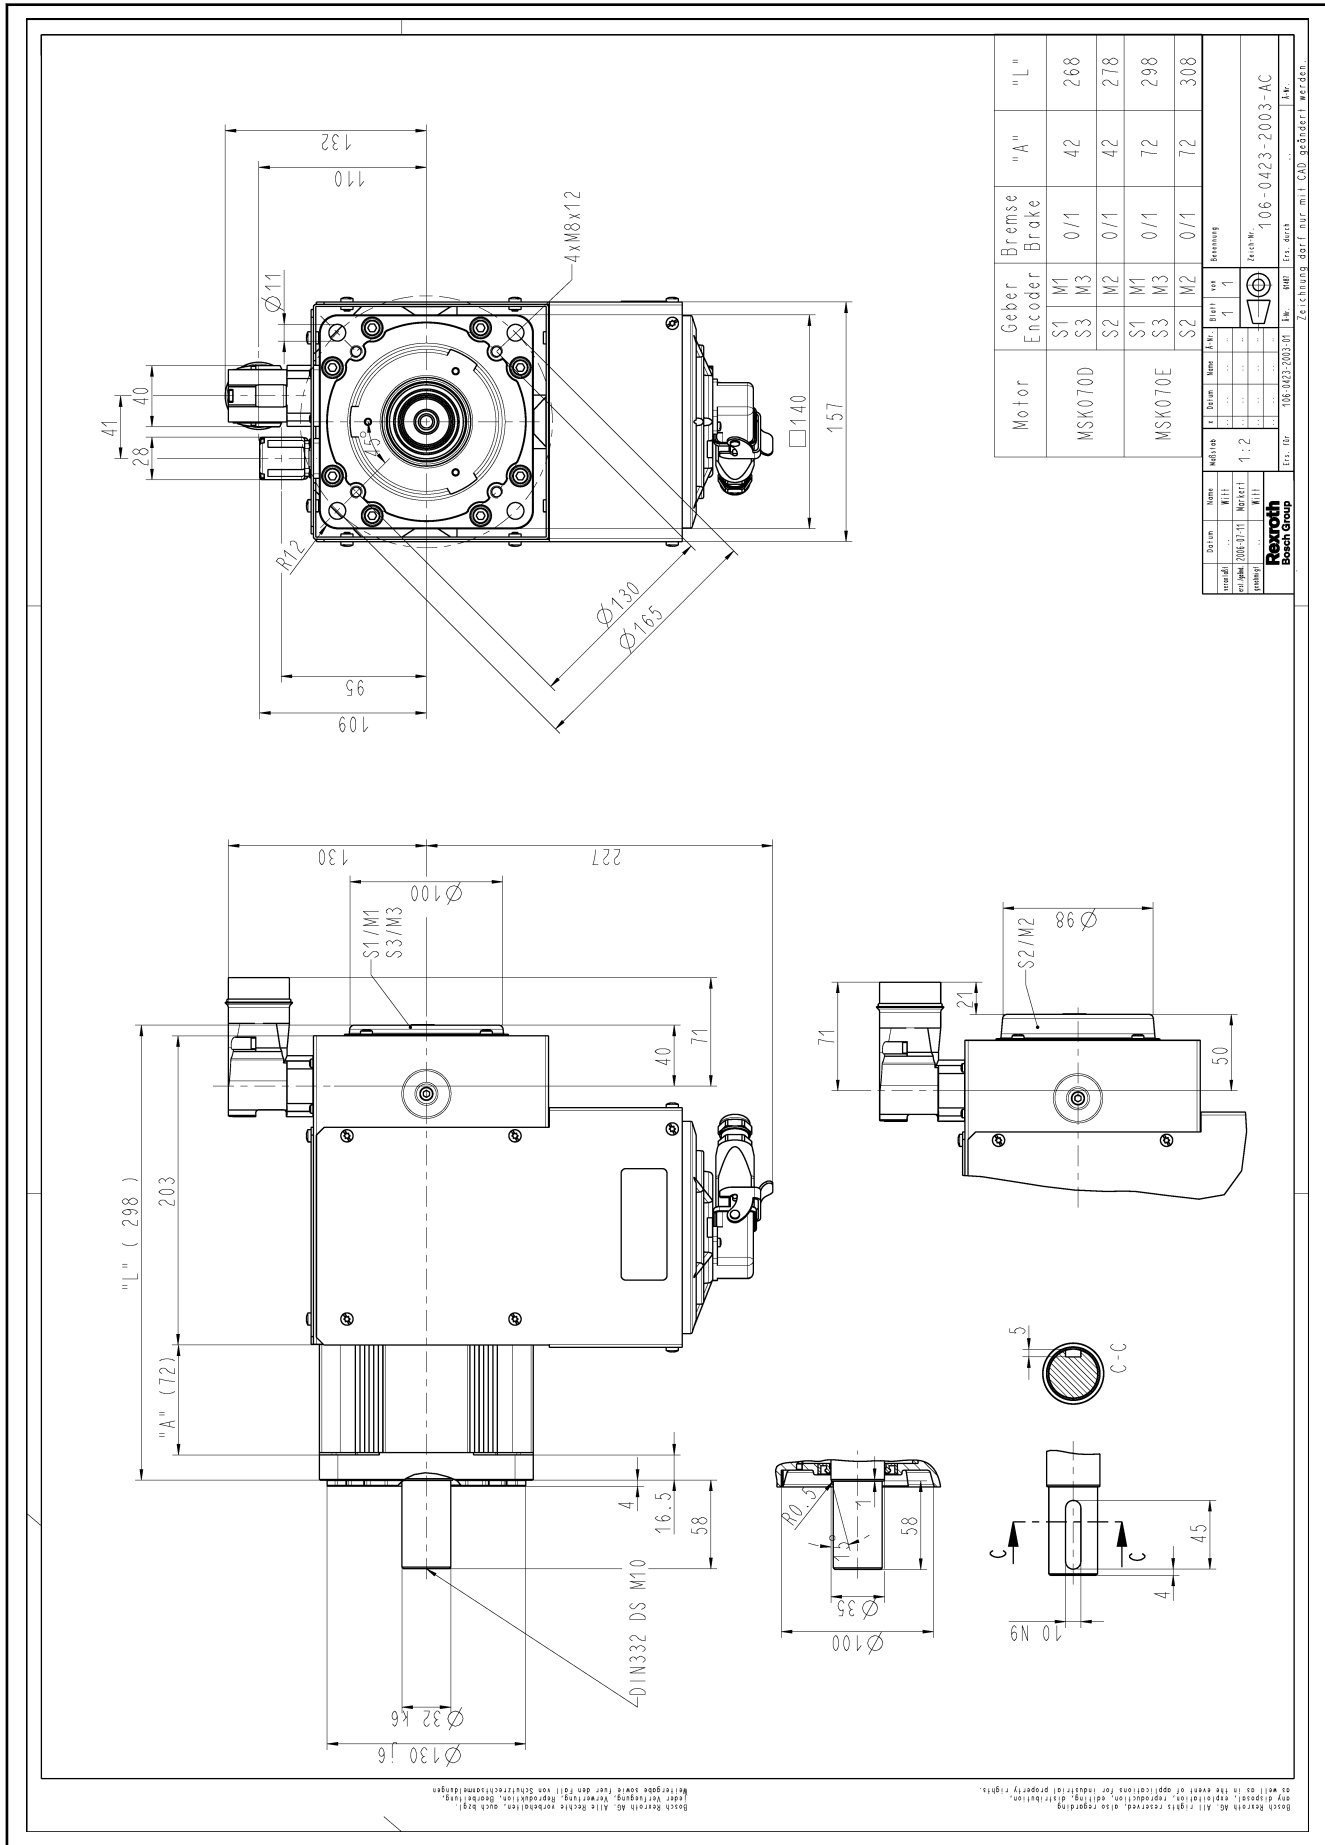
Dimension sheet MSK070 with radial fan unit
